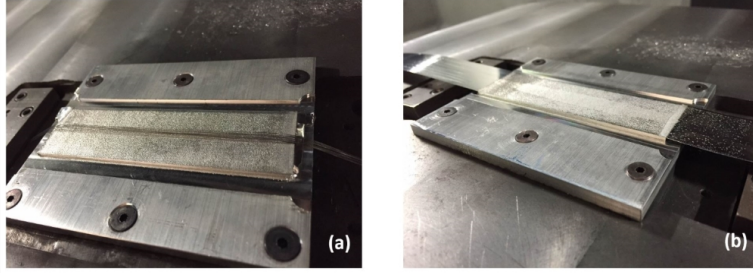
(a) Ten 0.006 in. diameter HSS wires laid out before welding over. (b) Ten 0.006 in. diameter HSS wires after welding over.
